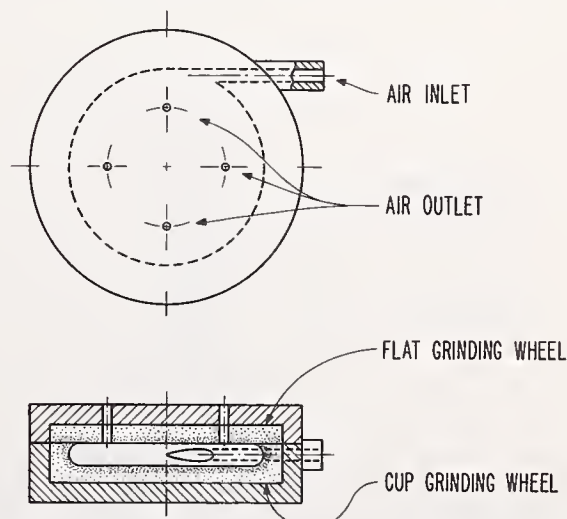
Air driven tumbling machine showing air flow and shape of abrasive wheel.
